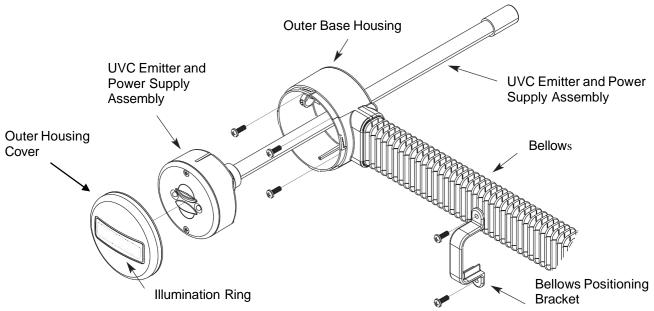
Exploded Drawing of One UVC Emitter and Power Supply Assembly within Steril-Home Dual Kit
